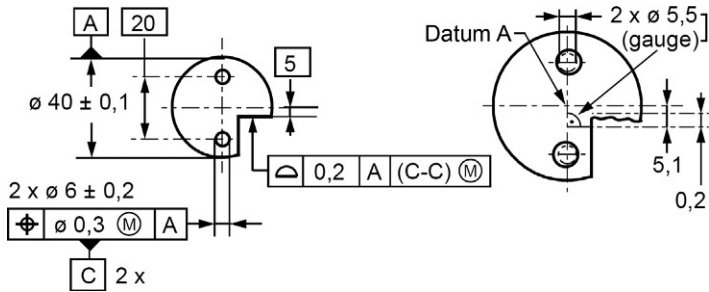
ISO tolerancing similar to Fig. 14.16 lower image: contact at horizontal surface not needed
